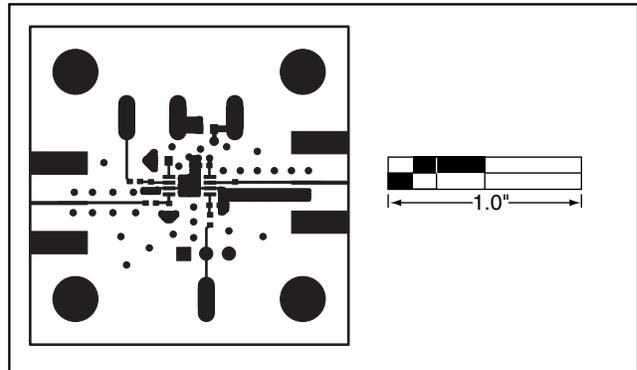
MAX2754 EV Kit PC Board Layout—Component Side
